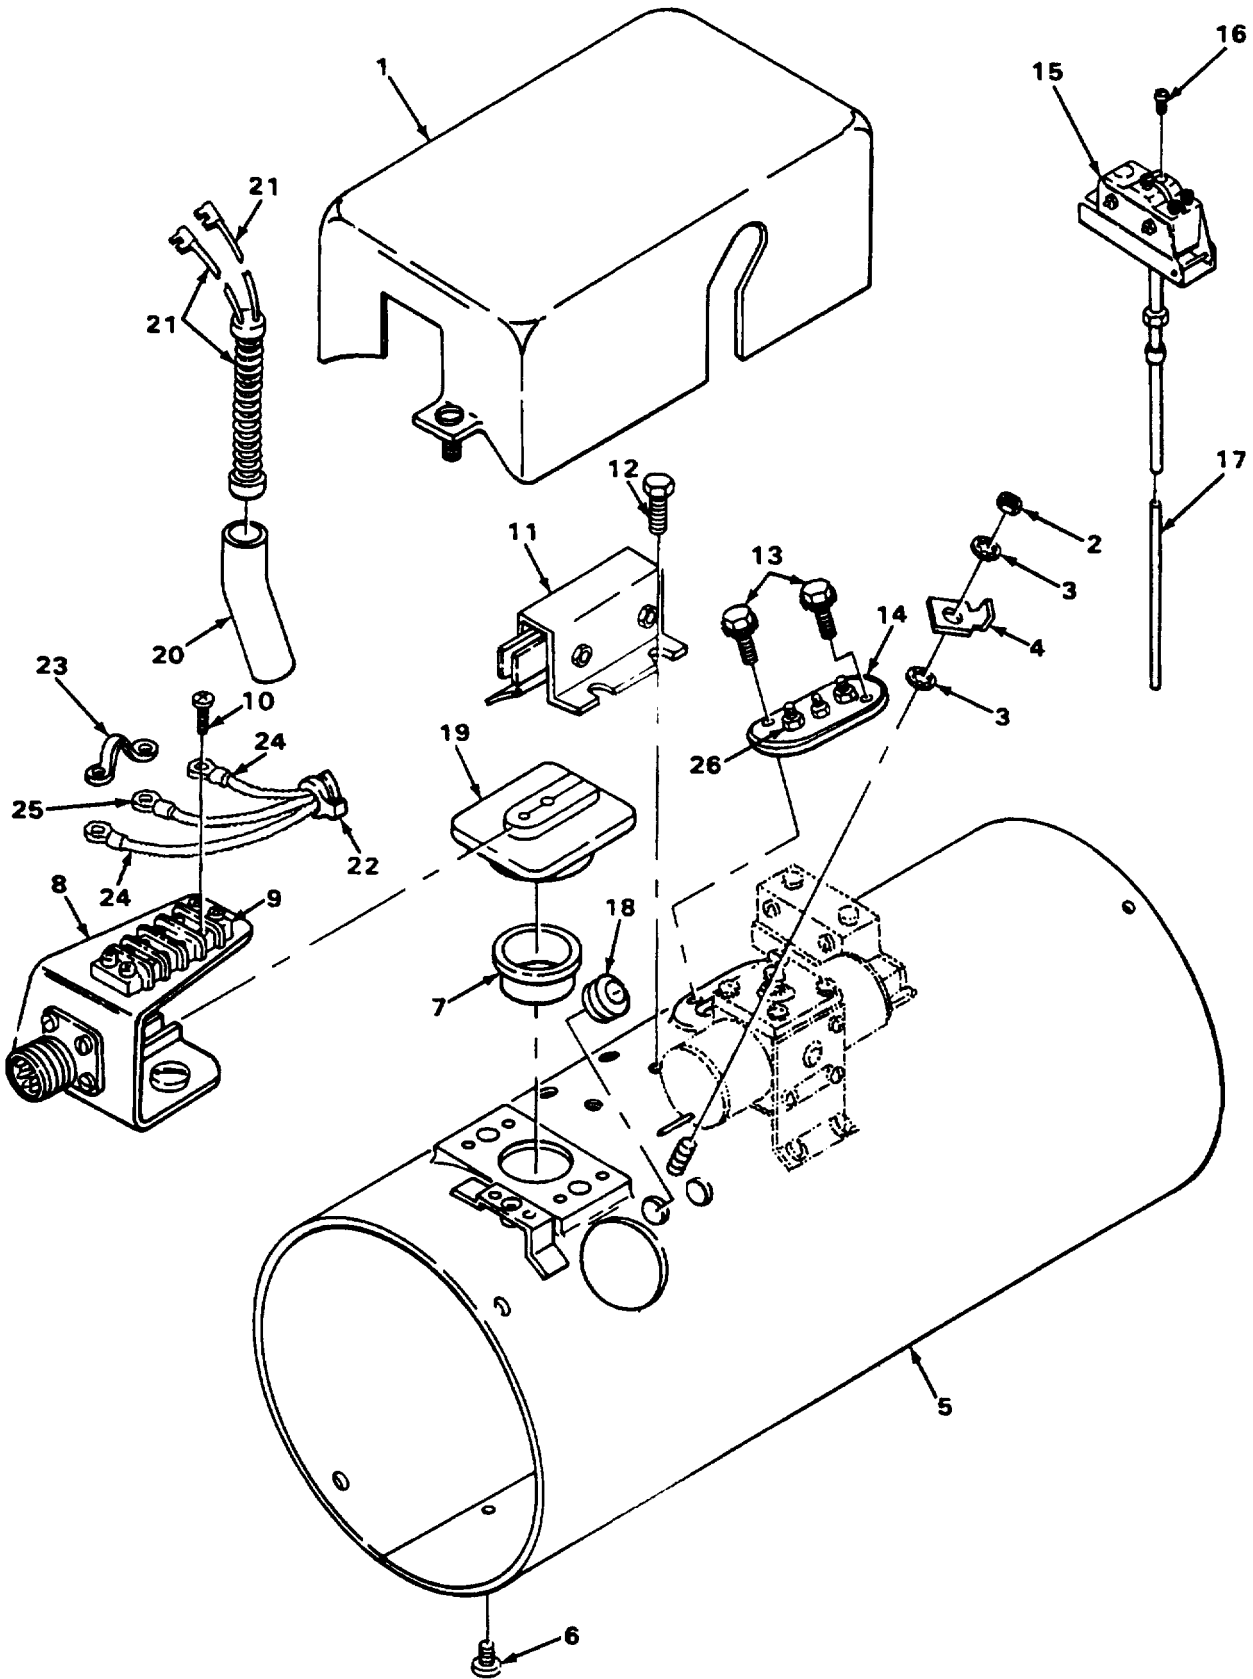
STEWART WARNER MODEL IGNITER, FLAME DETECTOR SWITCH, OVERHEAT SWITCH AND IGNITION CONTROL ASSEMBLY.
